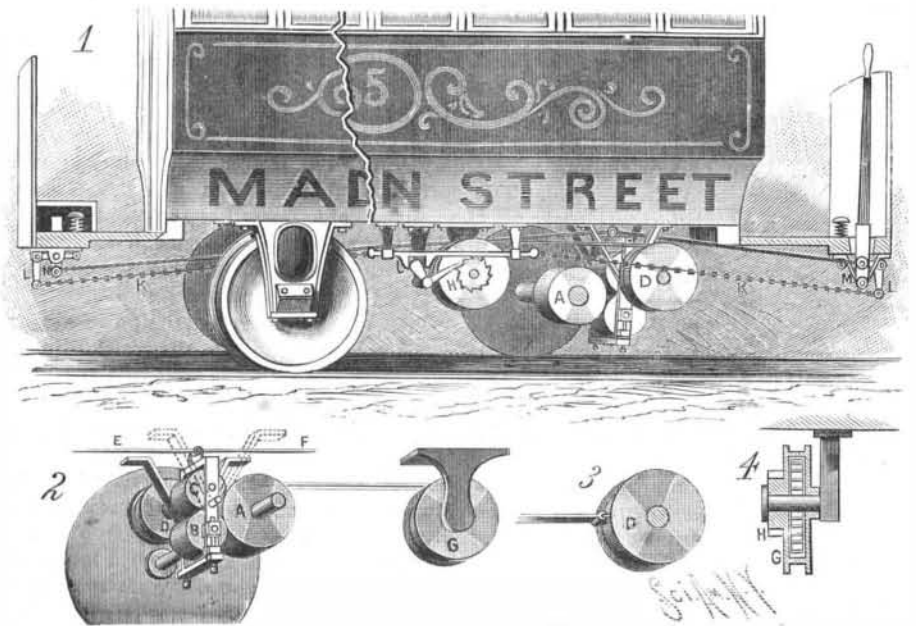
is a perspective view, partly in section, Fig. 2 is a detail perspective view of principal parts of the mechanism, Fig. 3 shows the connection of the spring tension band with the barrel on one of the friction wheel shafts, and Fig. 4 is a vertical sectional elevation of the starter spring, with its barrel or case and attached ratchet wheel. To the axle of the wheels there is fixed a friction drum, A, against which friction wheels, B C, fitted in a frame, are adapted to act, this frame being so pivoted that either of the wheels may be brought into contact with the drum. On the shaft of the friction wheel, C, there is fixed a barrel, D, to which is connected one end of a band or belt, the other end being secured to the periphery of a case or barrel, G, within which is fitted a coiled spring, the case being journaled on a shaft fixed in a hanger pendent from the car body. One end of this spring is fixed to the shaft, and the other end to the case, to which also is fixed a ratchet wheel, H, with which a dog pivoted in a hanger fixed to the car body is adapted to engage to prevent the unwinding of the spring until the dog is tripped. The connection of the band with the barrel, D, is such as to allow the band to wind in either direction on the barrel. To the top of the pivoted friction wheel frame there are connected two rods, E F, extending to either end of the car, where they are connected with levers, M, whereby the contact of the friction wheels, B C, with the axle drum, A, is controlled. The dog pivoted to a hanger on the car body, and adapted to engage the ratchet wheel, H, on the spring barrel, G, is connected by chains, K, to elbow levers, L, at either end of the car, operated by foot plates attached to the platform.
